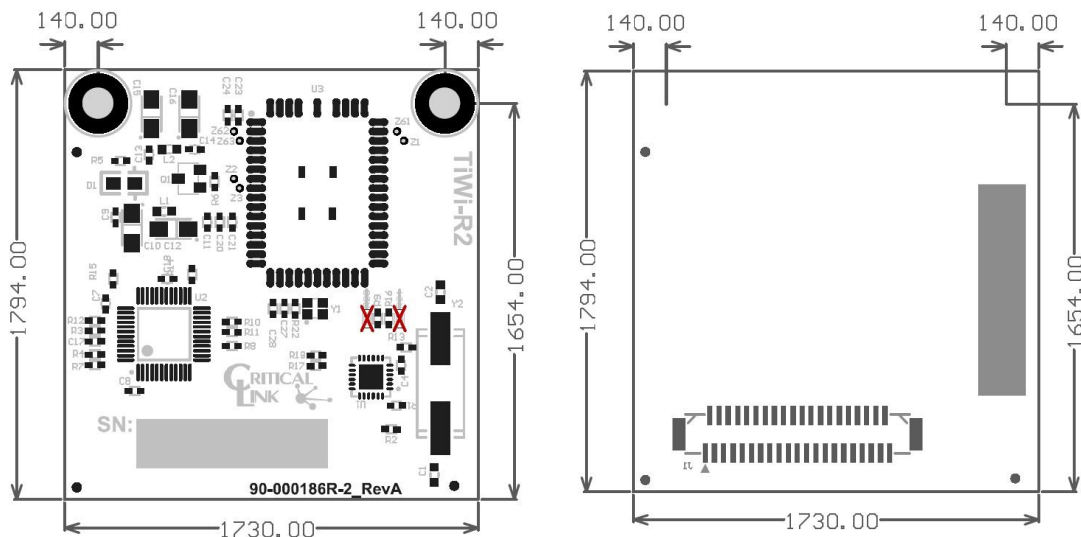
Dimensions 1.73" x 1.79" – Top and Bottom Mechanicals
